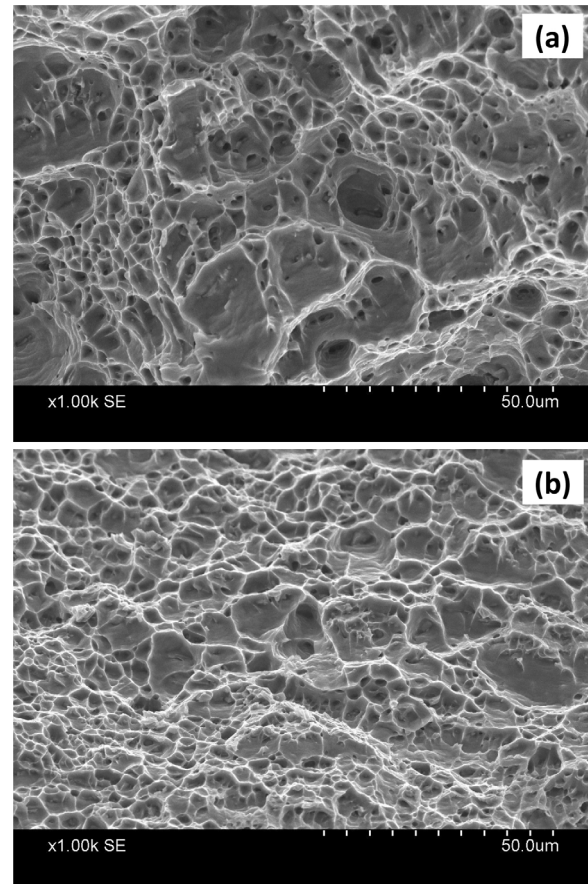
Representative SEM micrographs of tensile fractured surfaces of (a) base alloy and (b) composite specimens.
